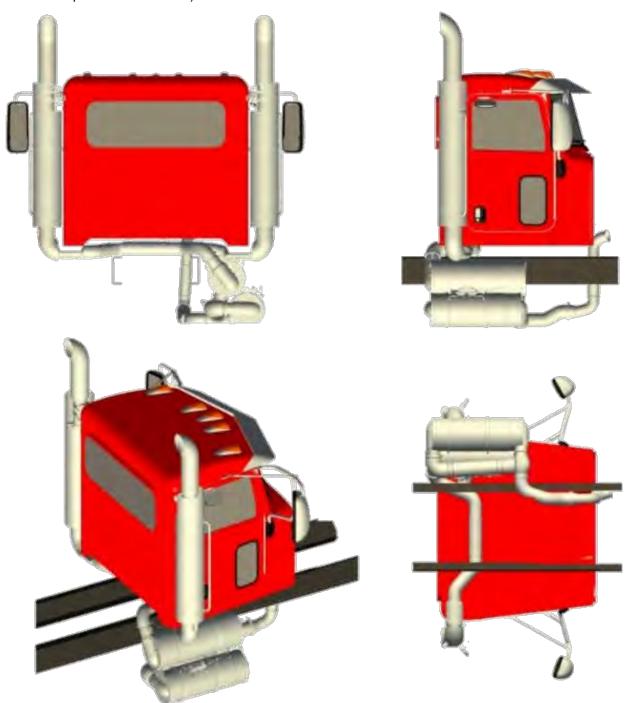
Exhaust Dual Side of Cab DPF/SCR RH Under Cab
